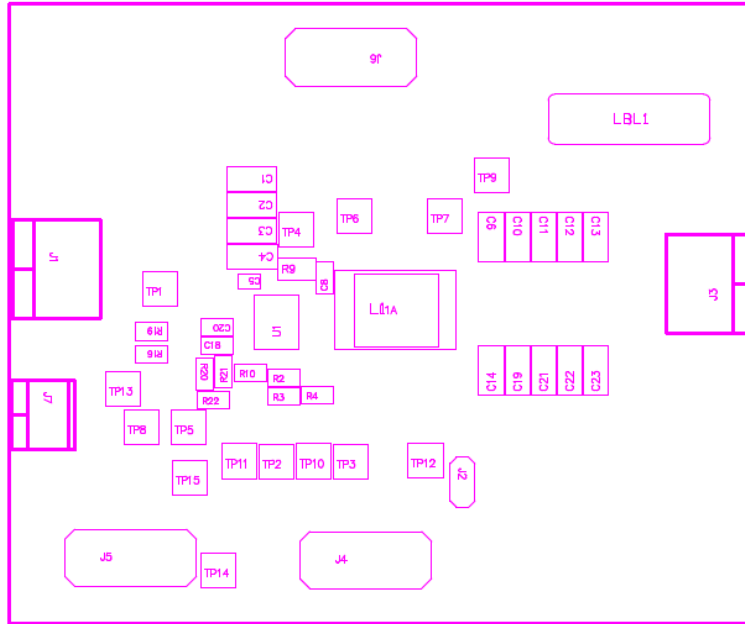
TPS53515EVM-587 Top-Layer Assembly Drawing
